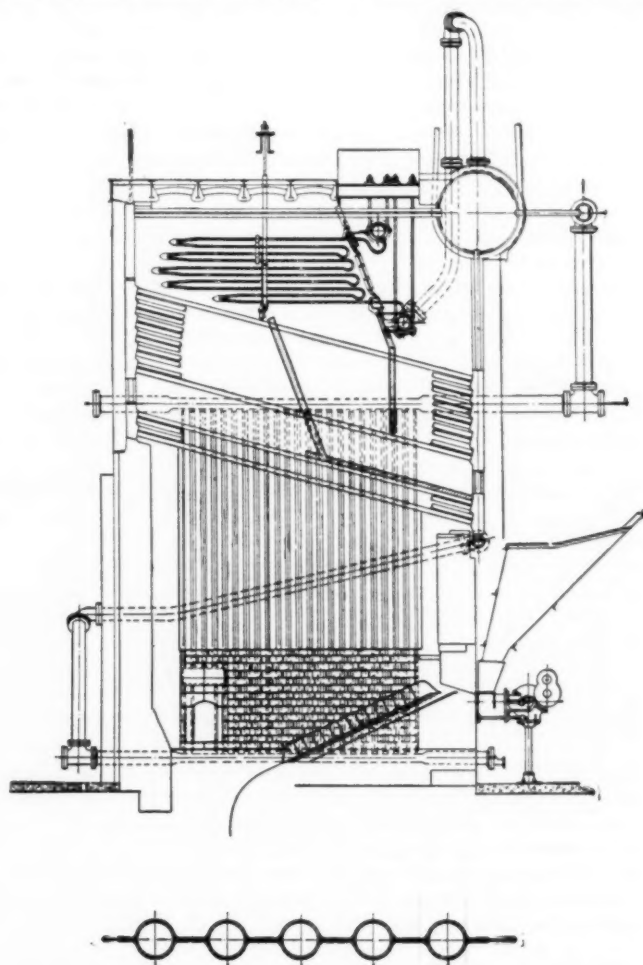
HORIZONTAL WATER-TUBE BOILER WITH SIDE WALLS MADE OF FOUR-INCH TUBES WITH WELDED-ON FINES
